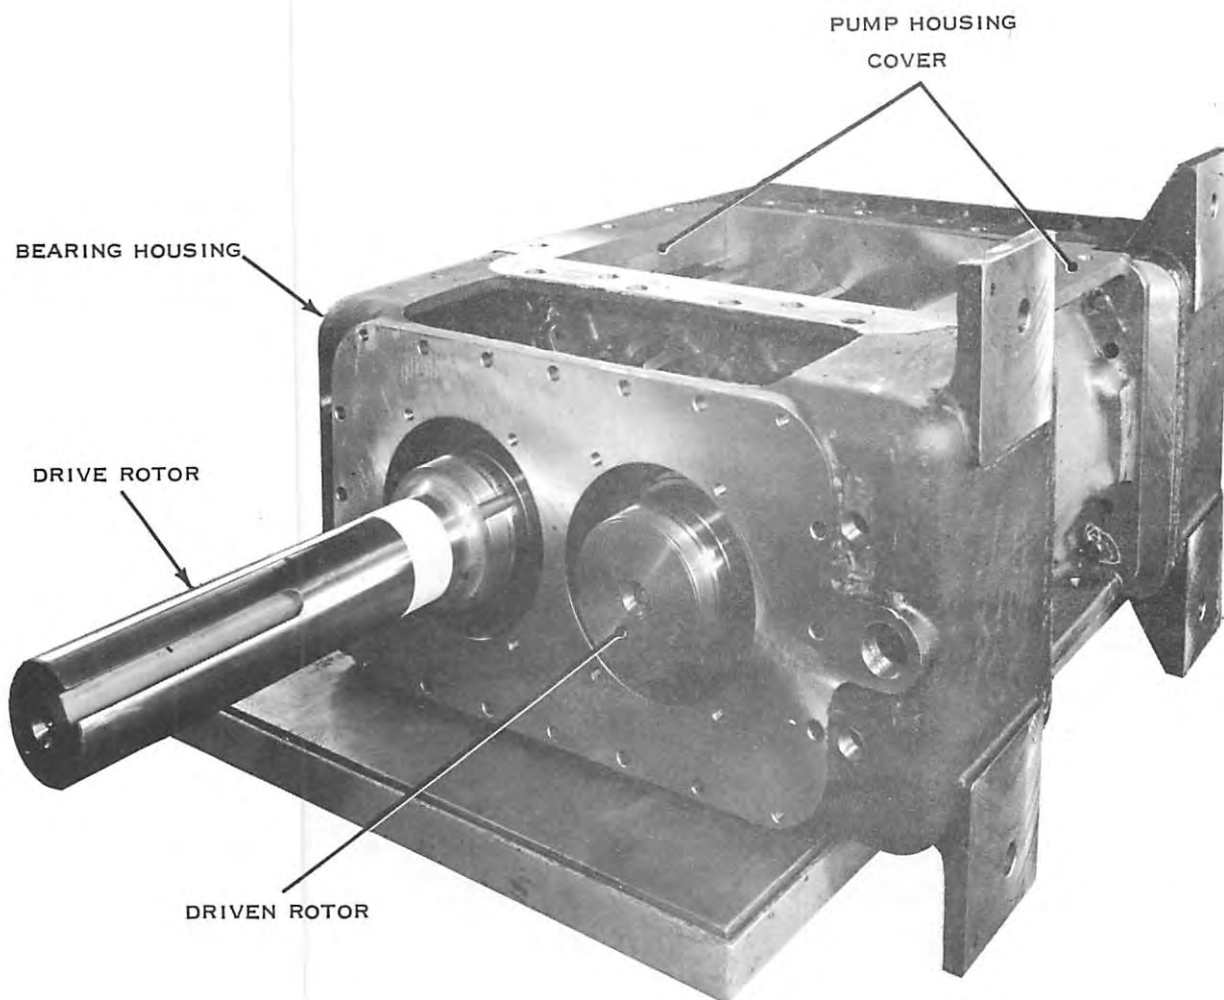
ASSEMBLY OF PUMP HOUSING COVERS
